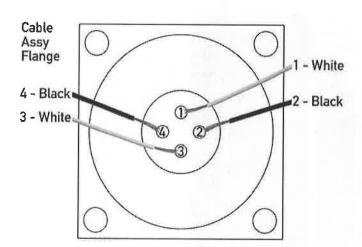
Combining the sketches from Figure 2, this illustrates the correct wiring on the cable assembly flange
